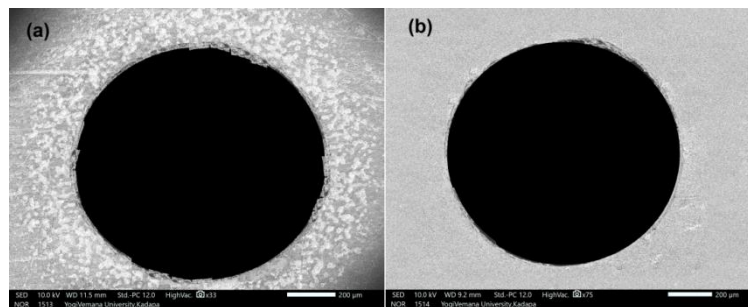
SEM images of machined hole with (a) bare tool (b) insulated hole
